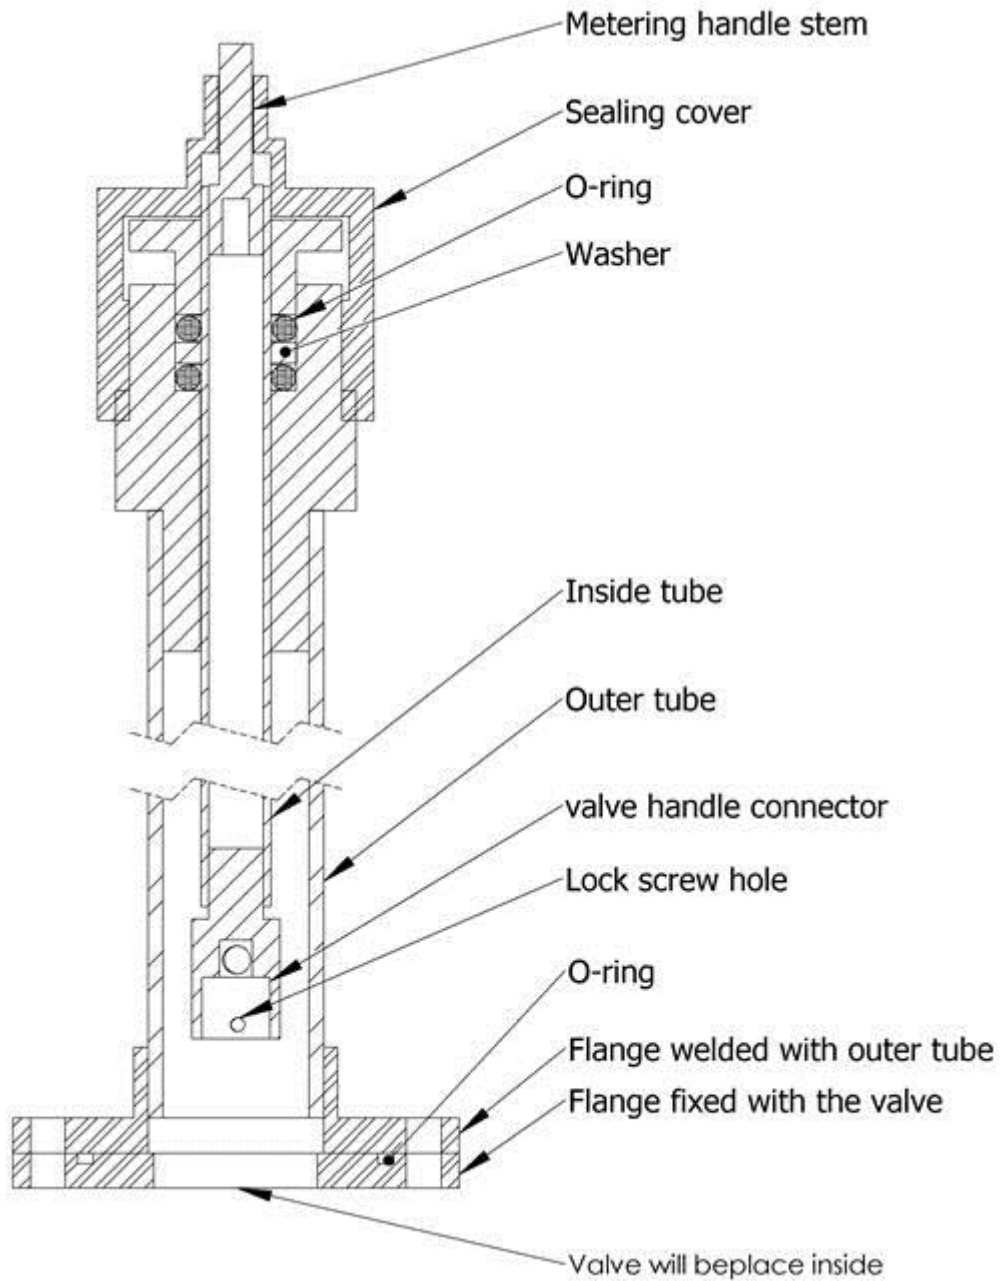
Long stem handle assembly for the J-T expansion valve
